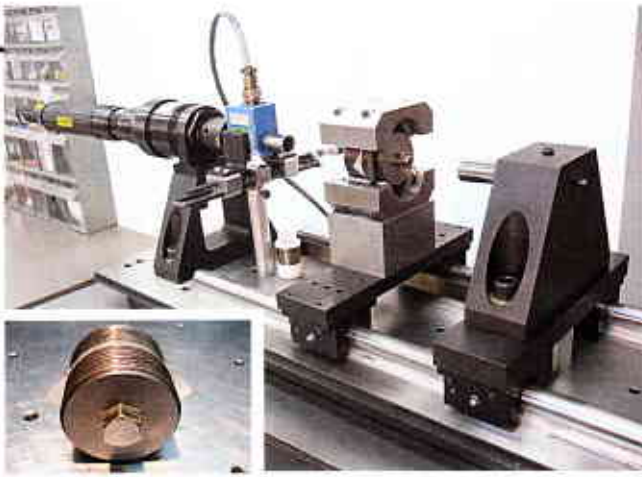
Bolt tensing setup with a joint close-up seen at lower left.
